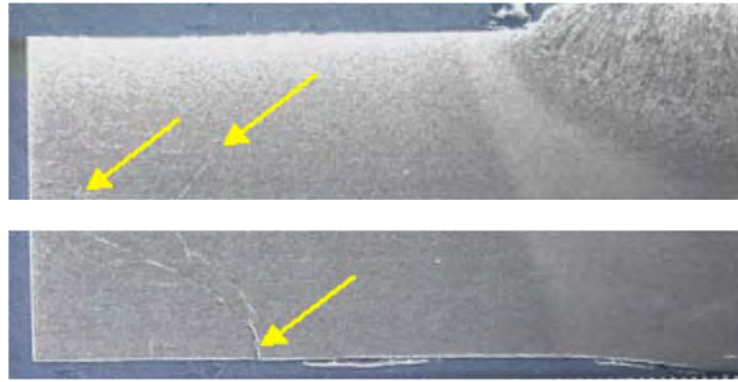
The top picture shows cracking initiating in the base metal on the ID of a section of piping adjacent to the weld. The bottom picture is a high-magnification photomicrograph of the crack above illustrating the predominately intergranular nature of the cracking. (Magnification 380X, Nital etch.)
